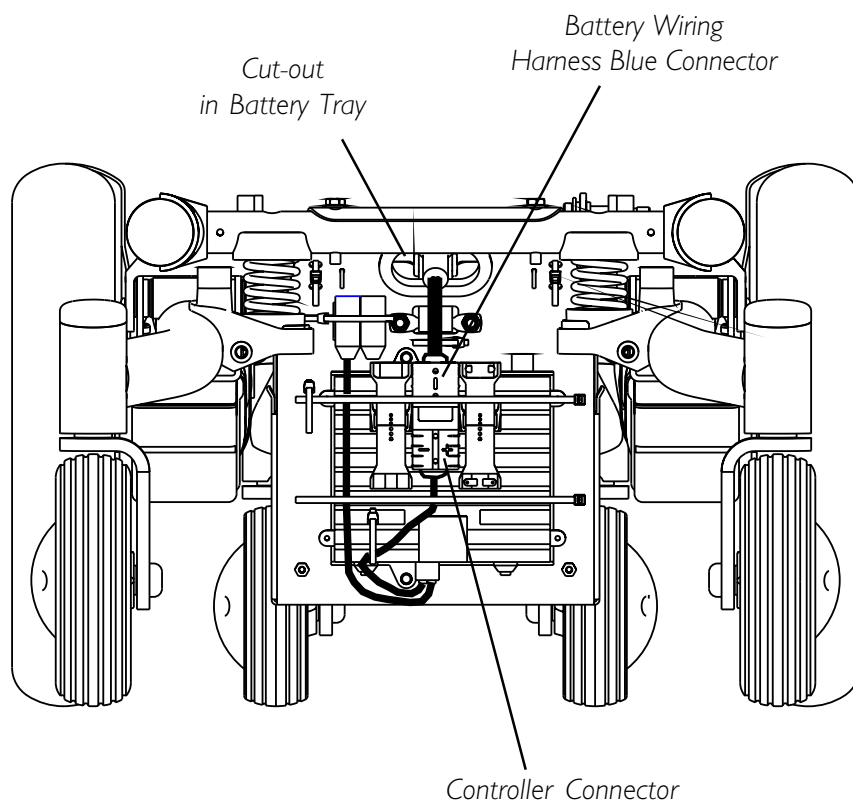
### DETAIL "A" - IDENTIFYING BATTERY WIRING HARNESS CONNECTORS
